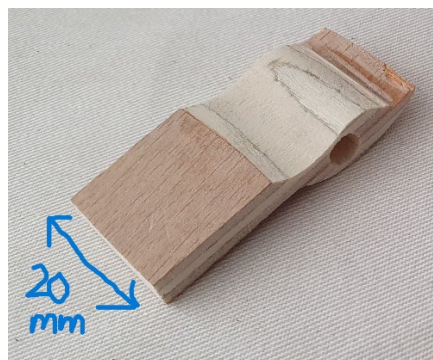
Individual key unit with flat upper, 5mm spindle hole and 'ledge' at the back for return spring engagement
